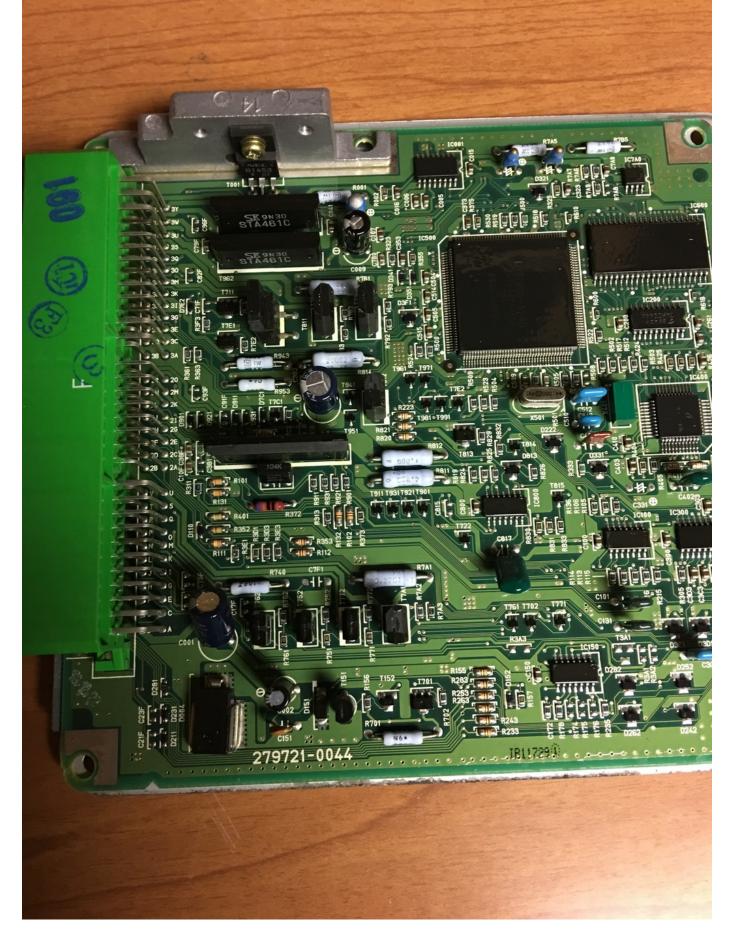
This is the top (front) view of the ECU board shown so we can see the board number
